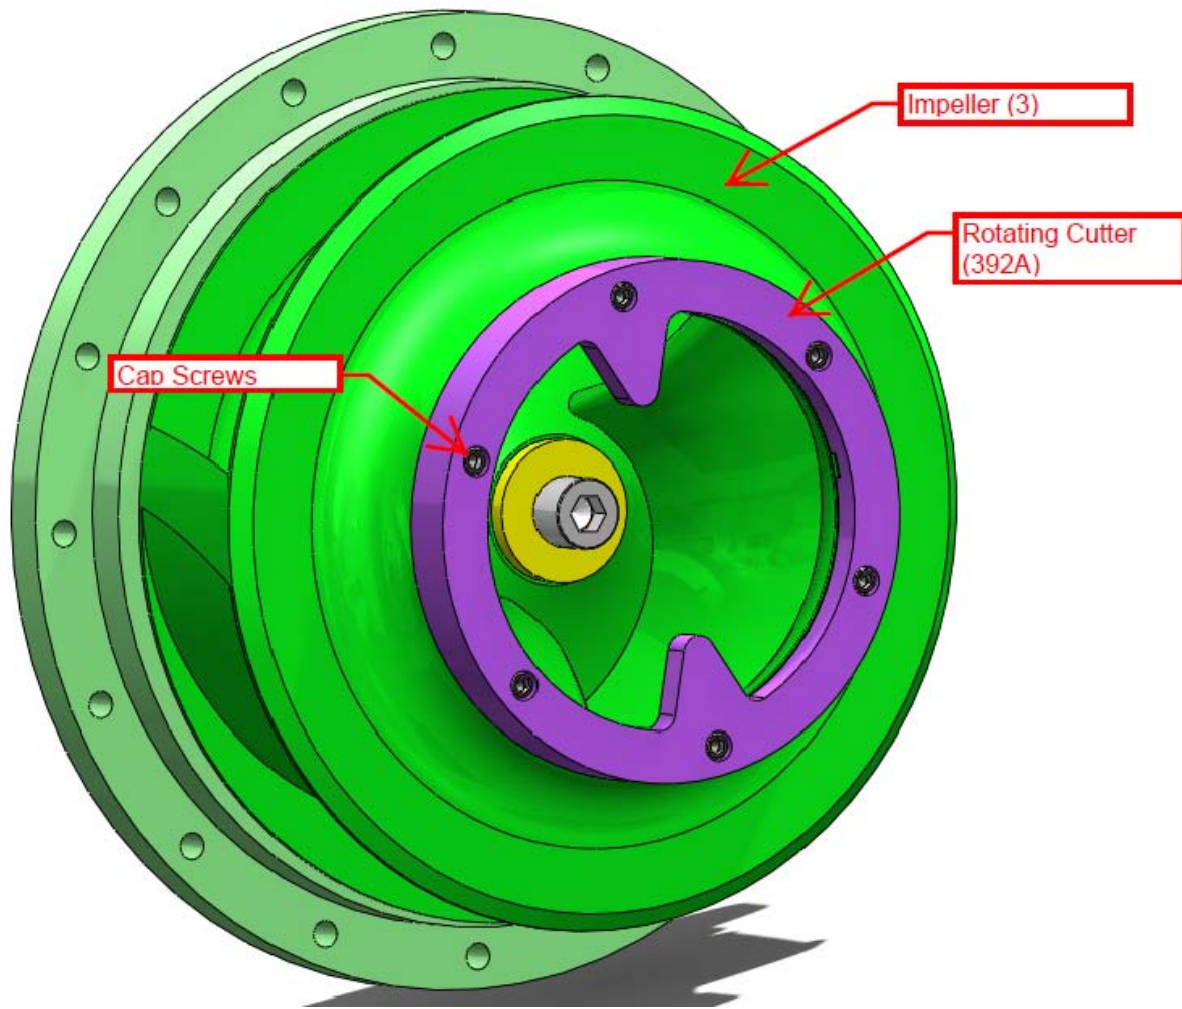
Rotating Cutter Ring and Impeller Subassembly
